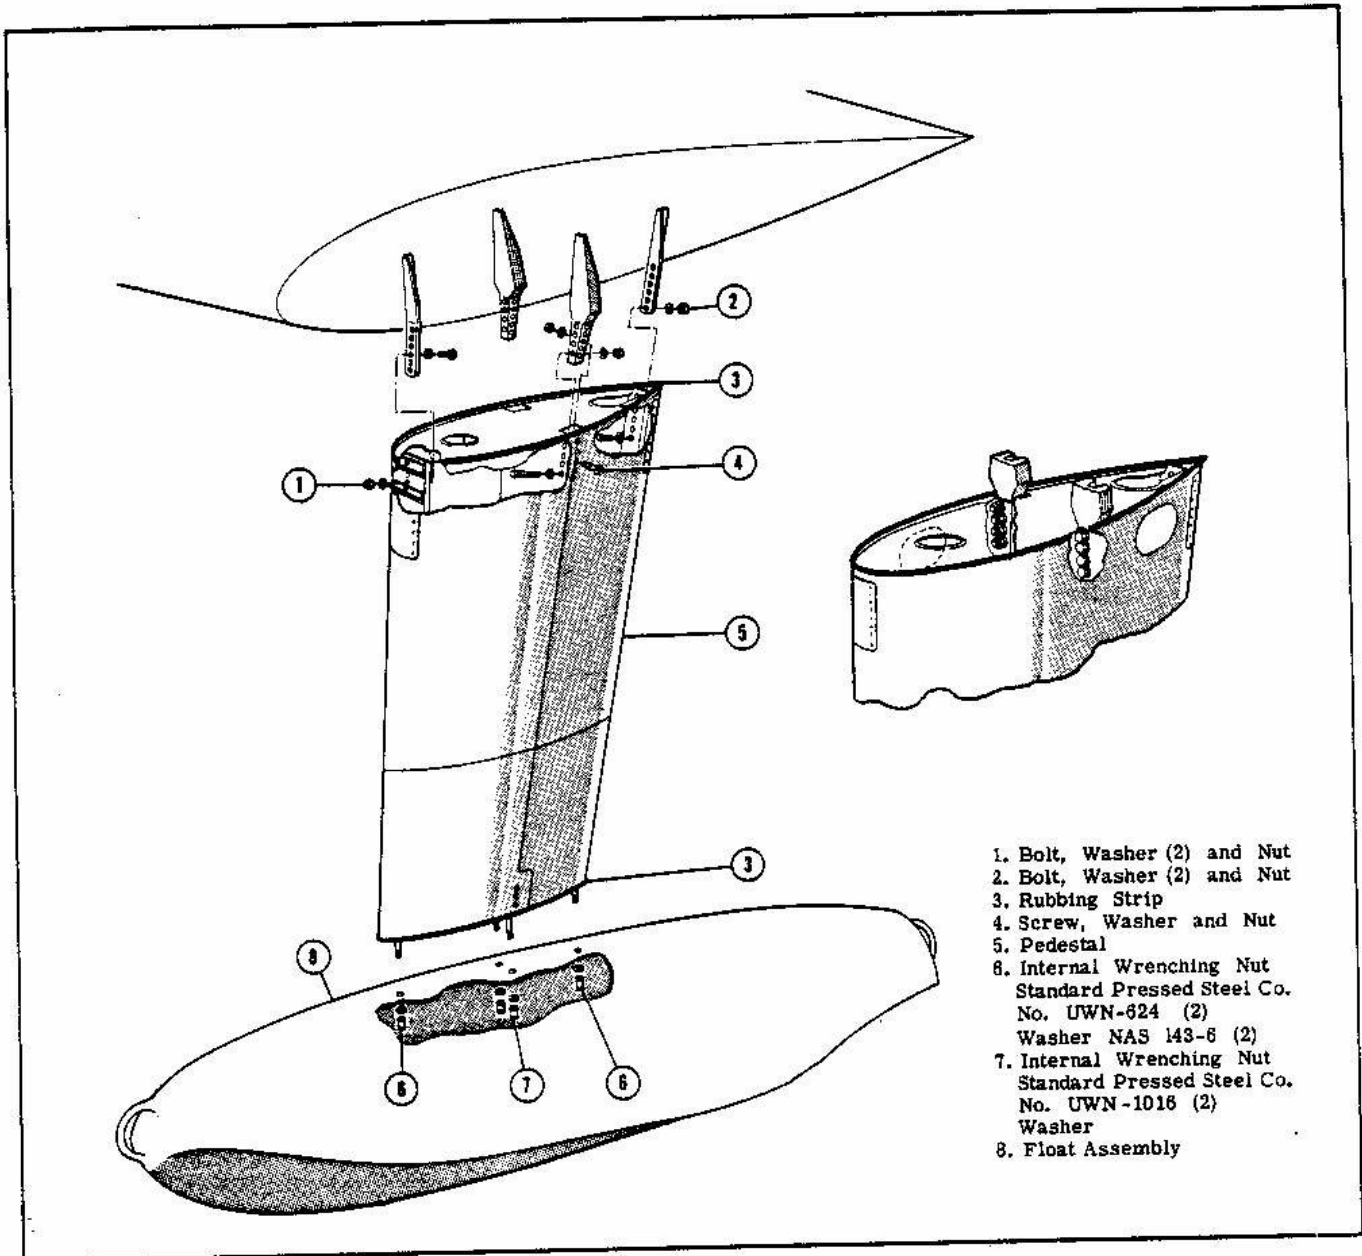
Wing Tip Float Installation—UF-1 Airplanes Ser No. 124374 through 124379
